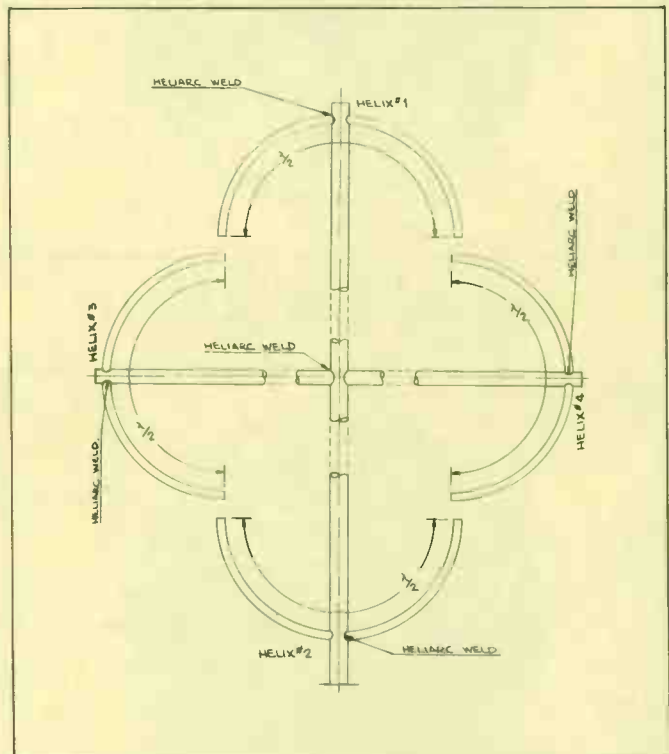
Heliarc Welding to the Cross Backbone Provides Rigid Mechanical Support
